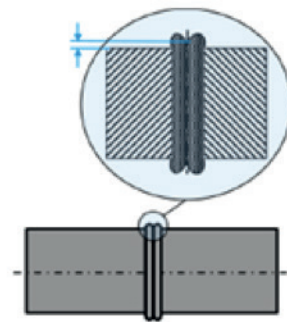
Visual quality control of the butt fusion welded joint
